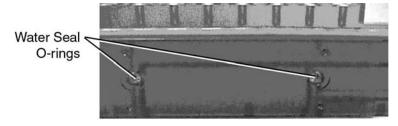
Pump Chamber Water Seal O-rings for Solo I, II, III
